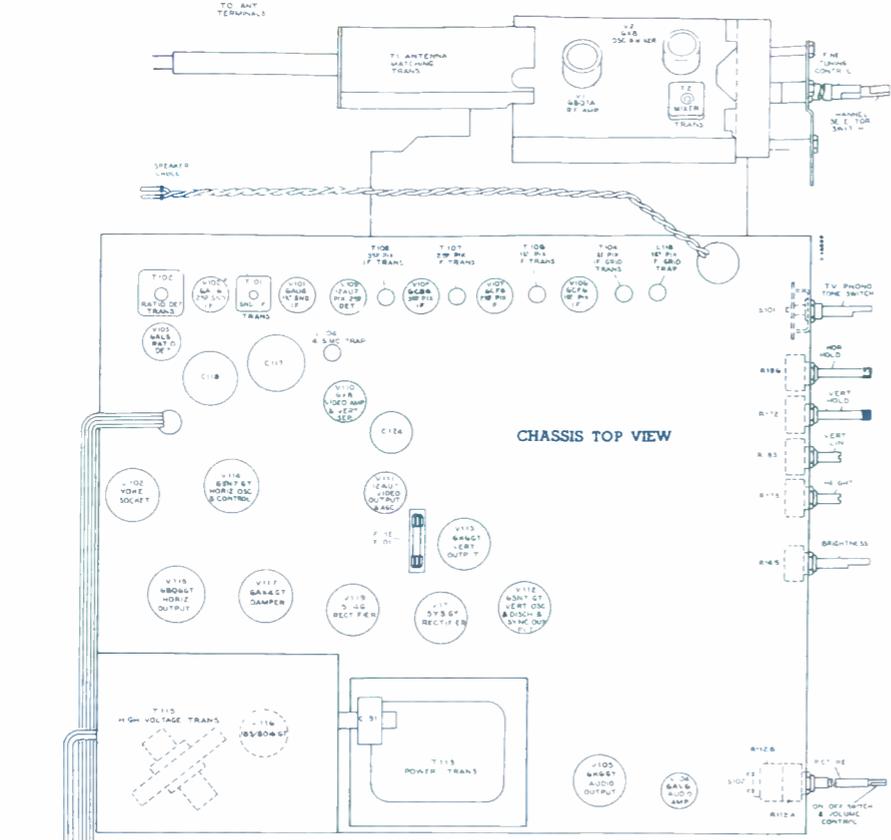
Chassis Top View (shown with KRK29 Tuner)
